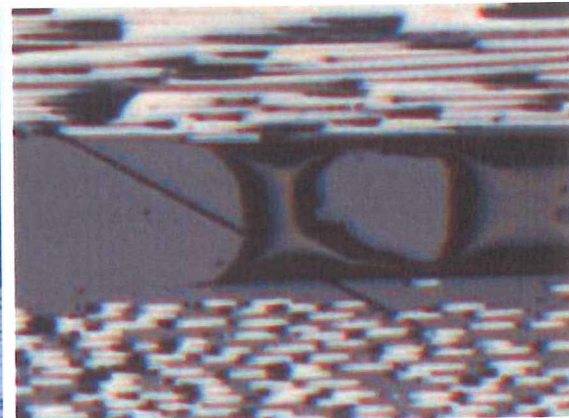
Squeeze flow of ED at the welding interface of a sample clip welded with 2,000 [J]. Still pieces of PEKK ED which have not been in a molten state are observed.
